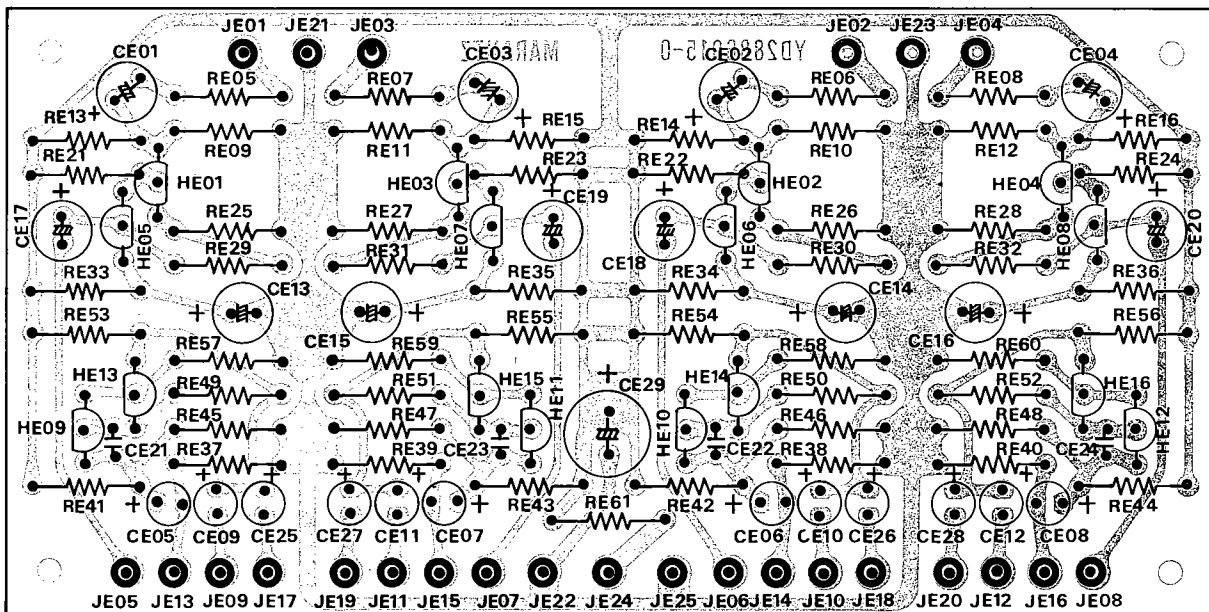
Tone Amplifier Assembly PE01 Component Locations
